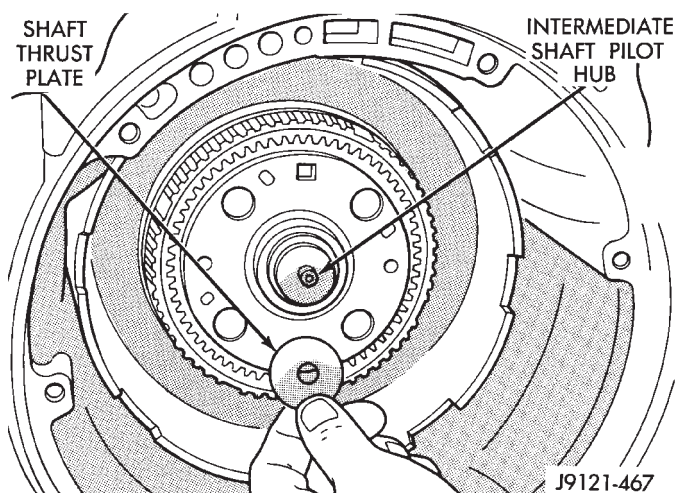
Intermediate Shaft And Planetary Geartrain
